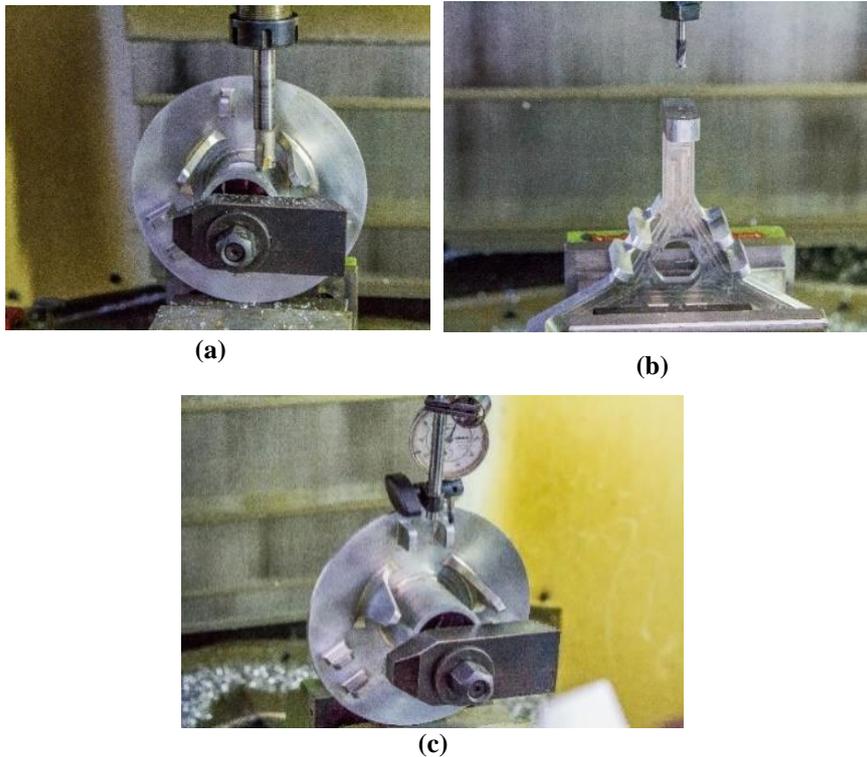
The various machining processes involved in fabrication of the CVT. (a) shows roughing cycle, (b) shows the drilling cycle and (c) shows the verification of tolerances using a dial gauge.
